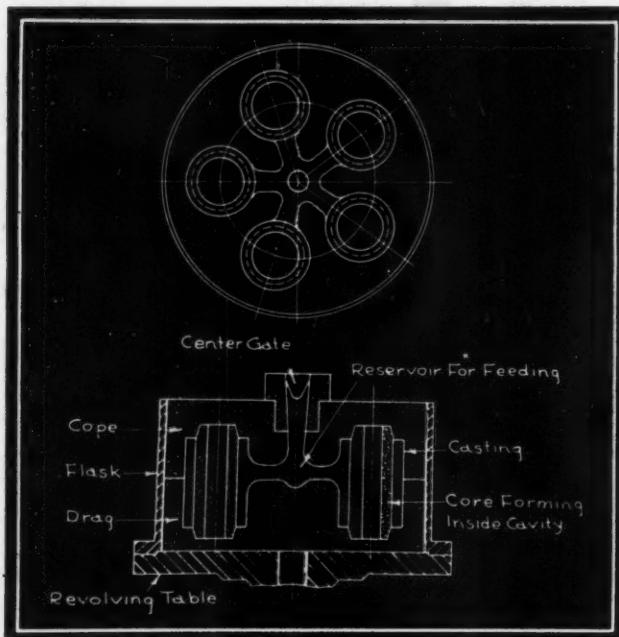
Centrifuge casting of bogie wheel hubs, five pieces being made in one mold. Method is adaptable to the forming of many odd-shaped castings
